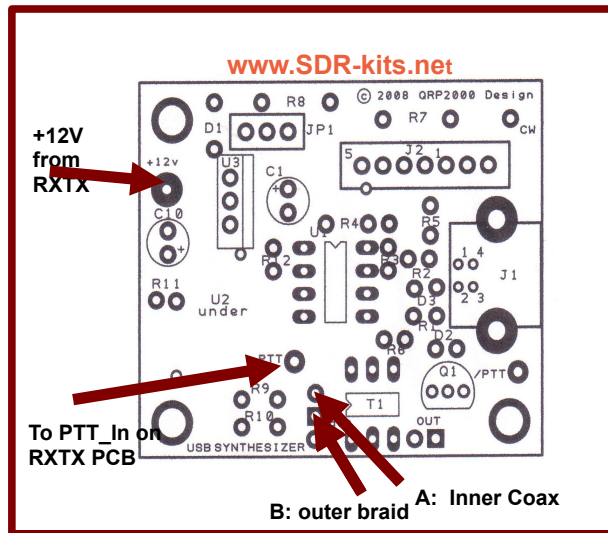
Connections on USB-Synthesizer PCB to support Softrock RXTX
